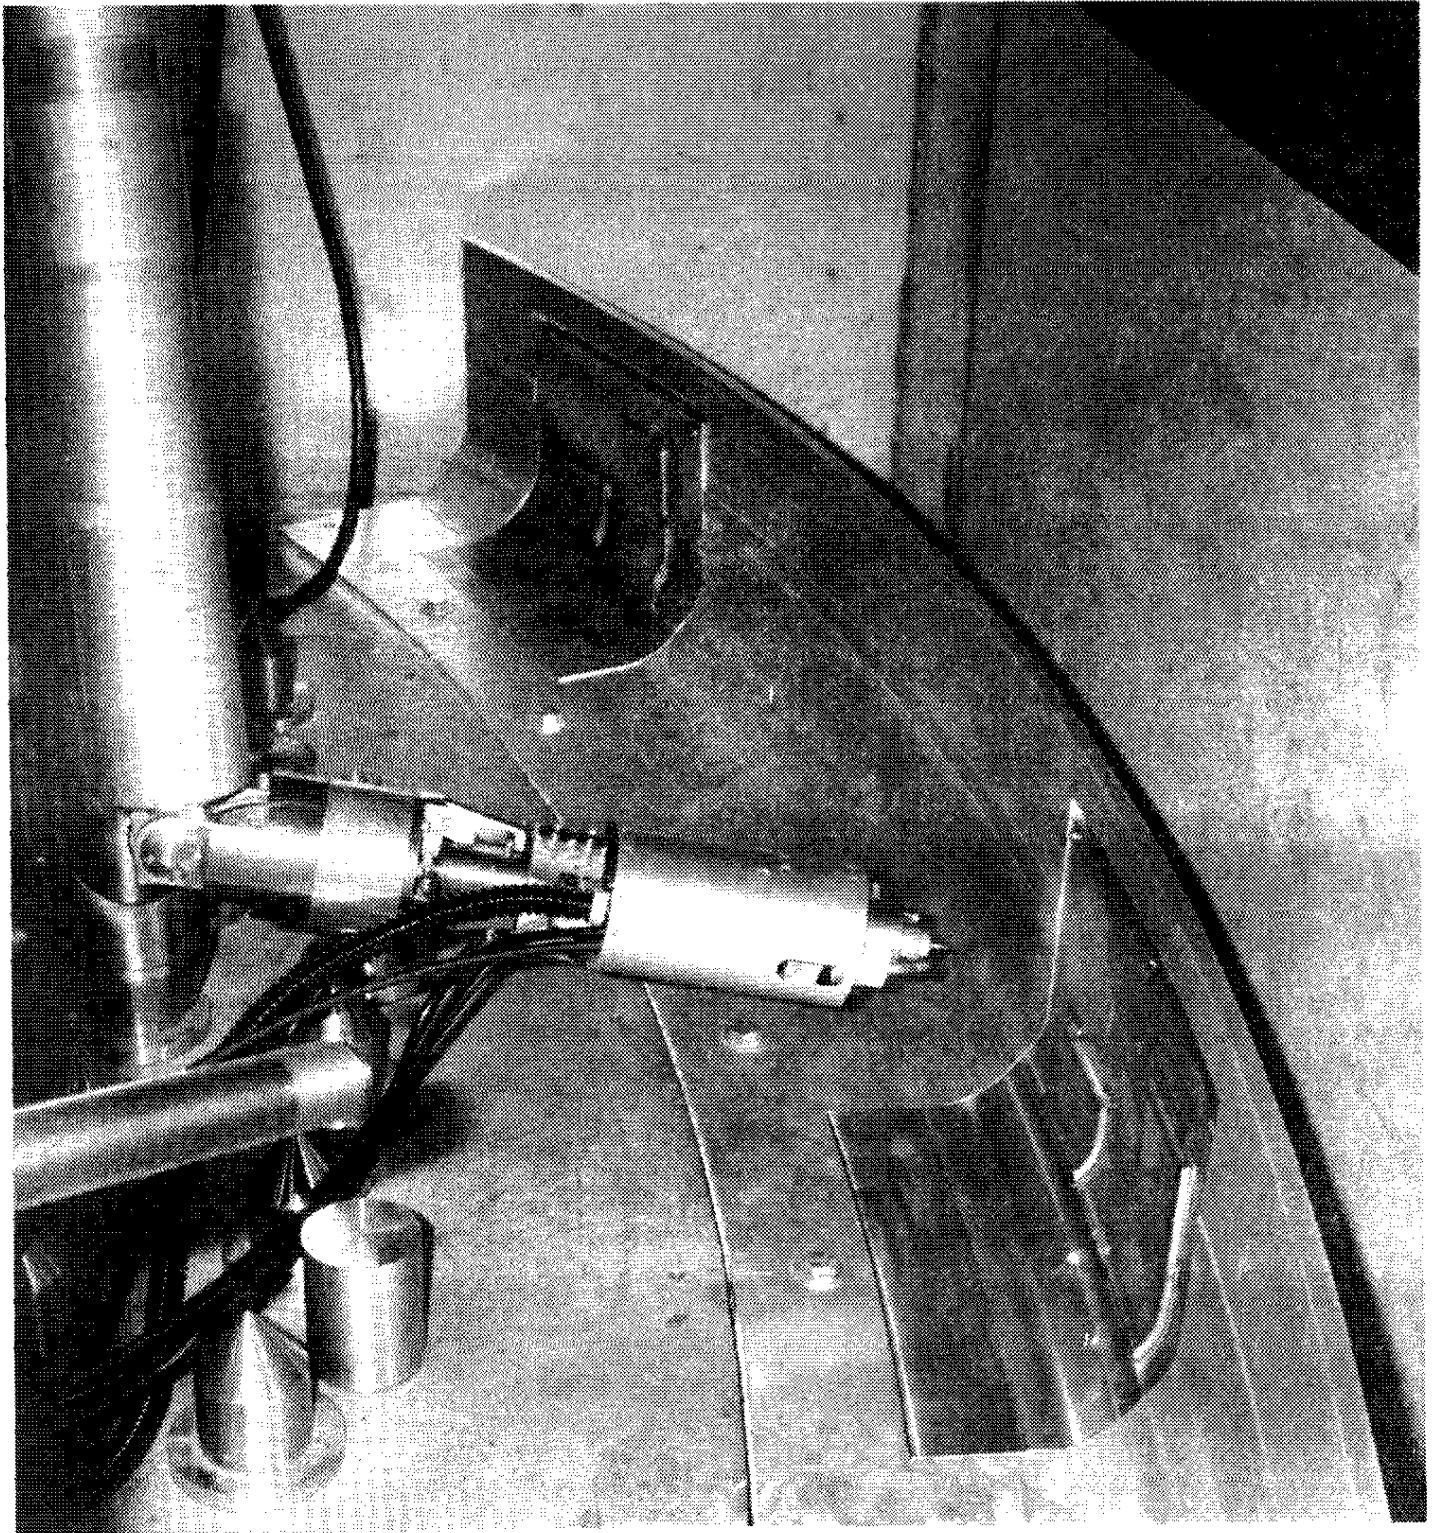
AUTOGENOUS WELD HEAD HELD BY ROBOT ARM IN PREPARATION FOR WELDING SMALL PATCHES OF INITIAL DESIGN IN MOCKUP FACILITY.
